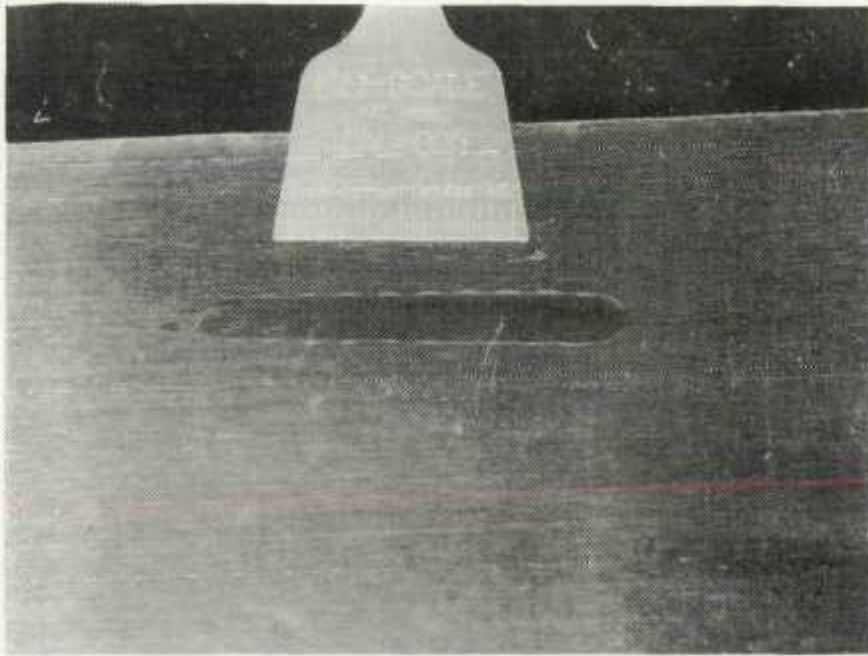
Kapton Side of Copper-to-Seam Weld
